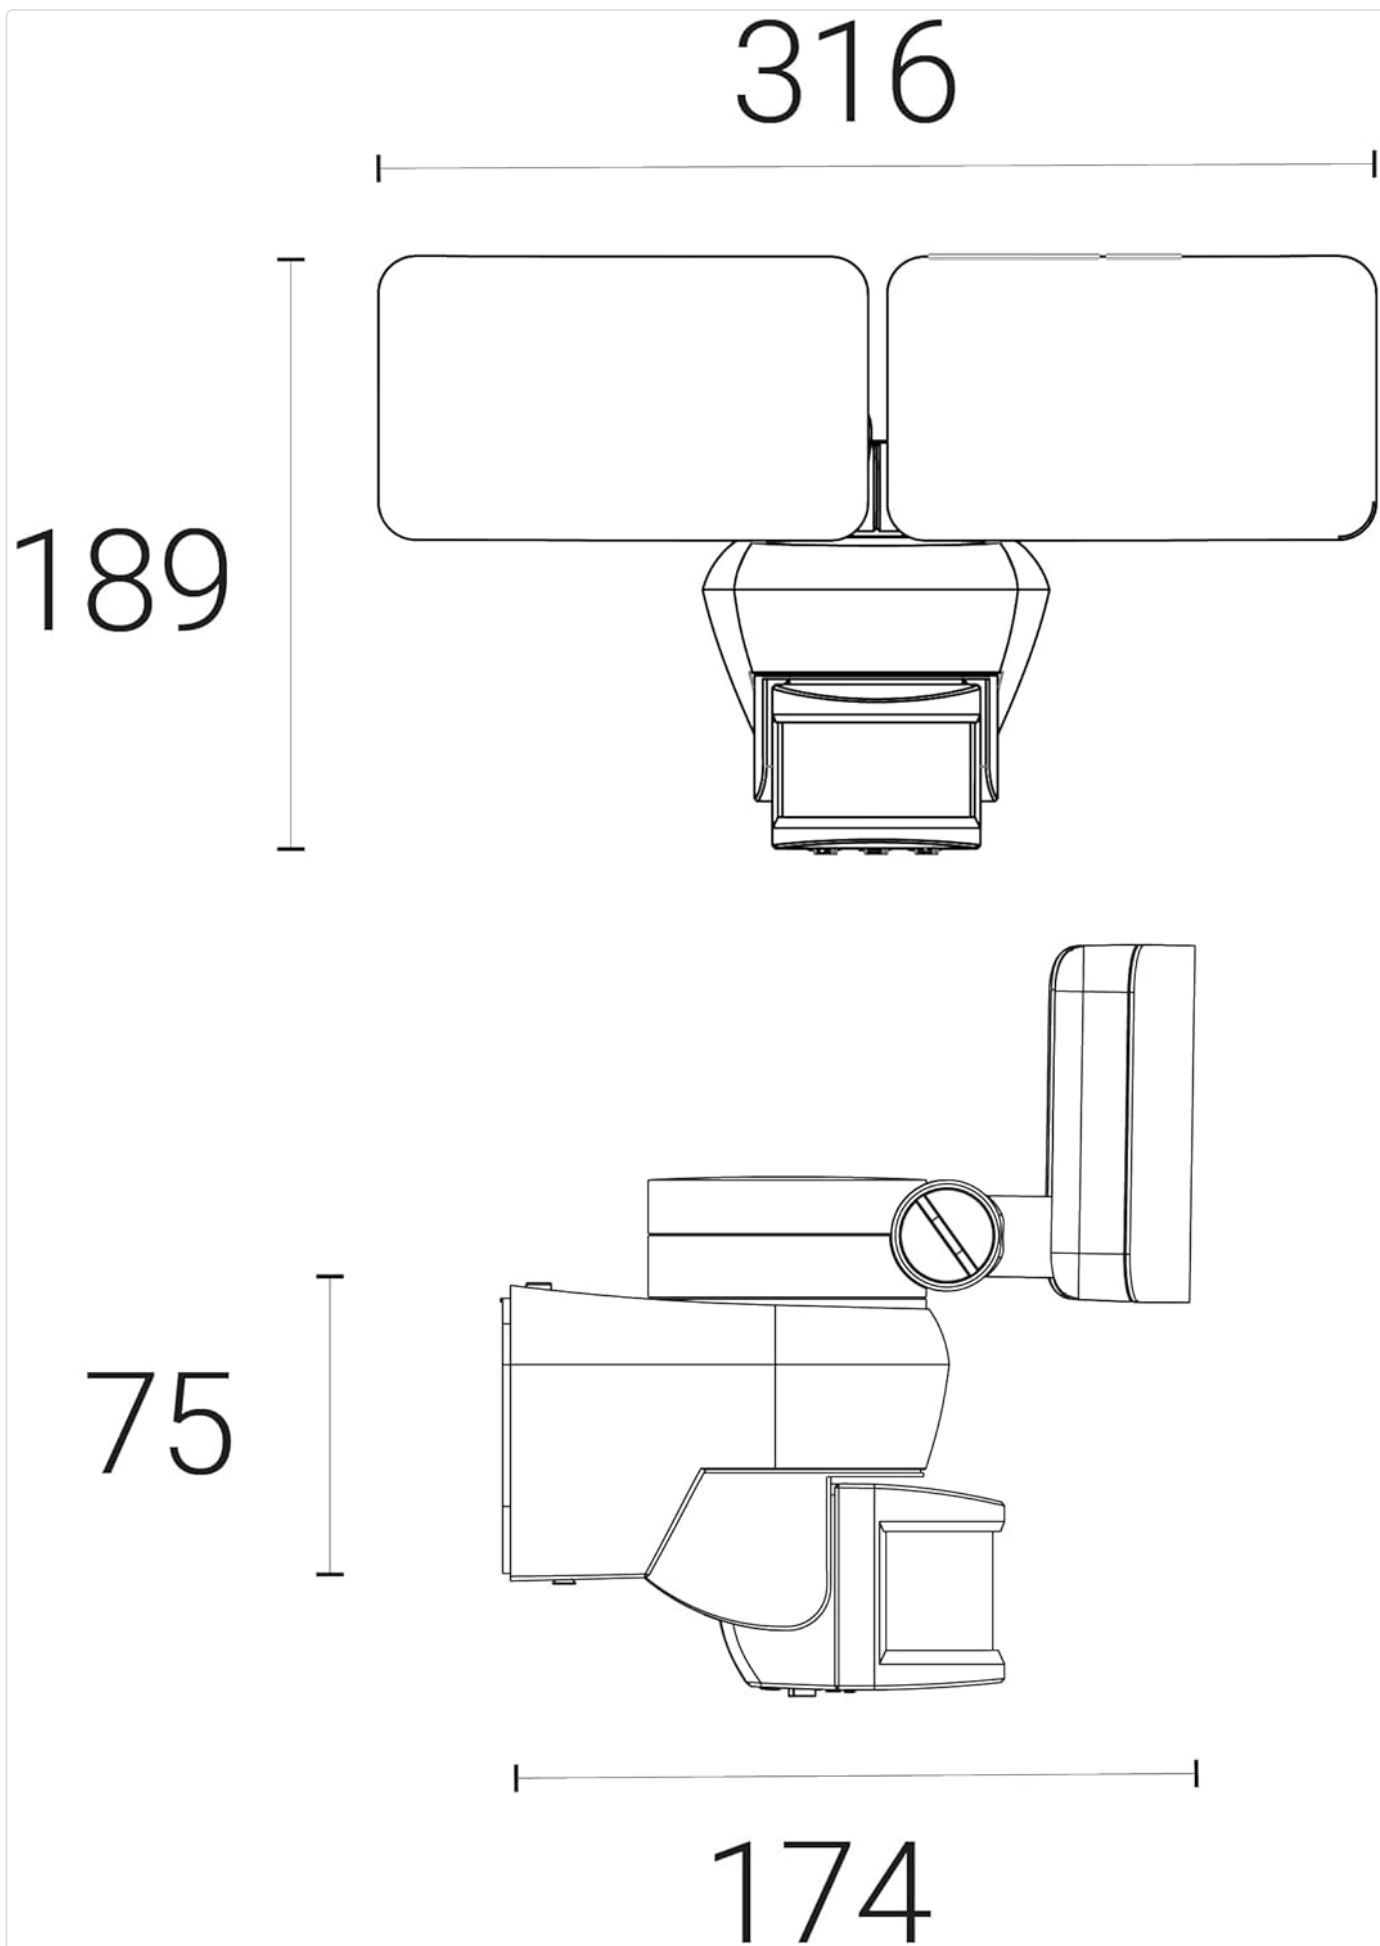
Technical drawing illustrating the dimensions of the floodlight in millimeters. The width is 316mm, height 189mm, and depth 174mm.
